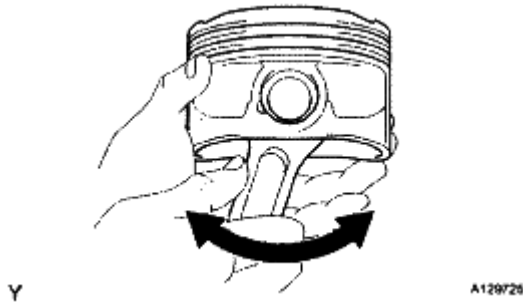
Checking Fitting Condition Between Piston And Piston Pin
